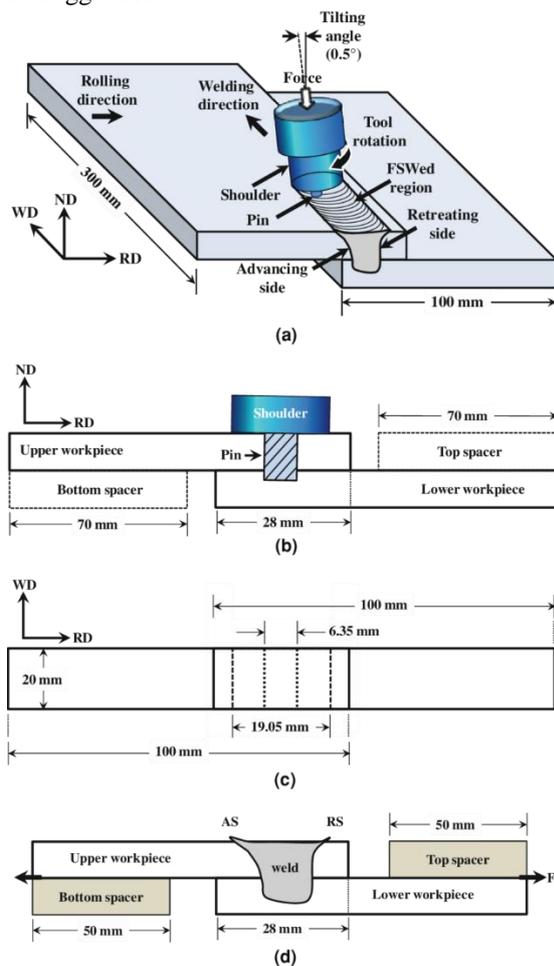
Experimental setup showing (a) the friction stir lap welding process, (b) the side view of the overlapped Mg/ Mg joint, (c) the top view of the welded coupon, and (d) the setup for fatigue testing (Mode I).
